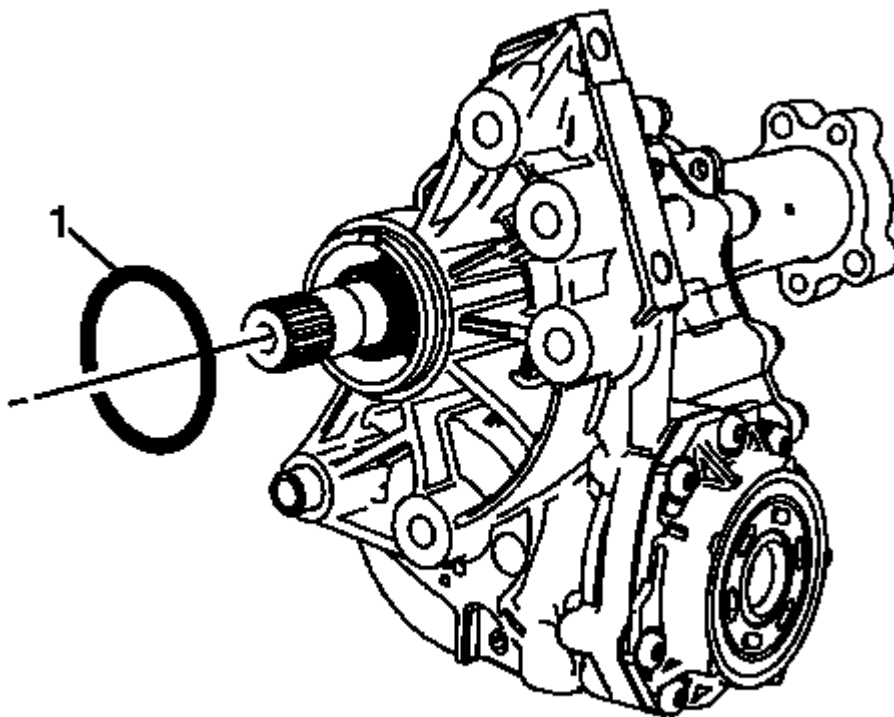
Identifying Transfer Case-To-Transmission O-Ring
